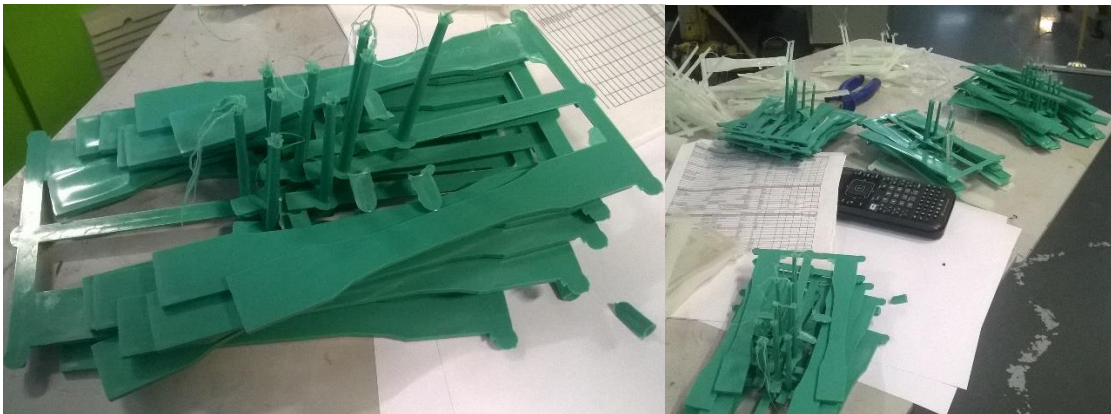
The pieces made in the test injection moulding (The author, 2016)
